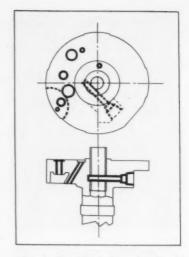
Simplified view showing in heavy line the operations performed on cast-iron distributor base by machine illustrated in Fig. 1
